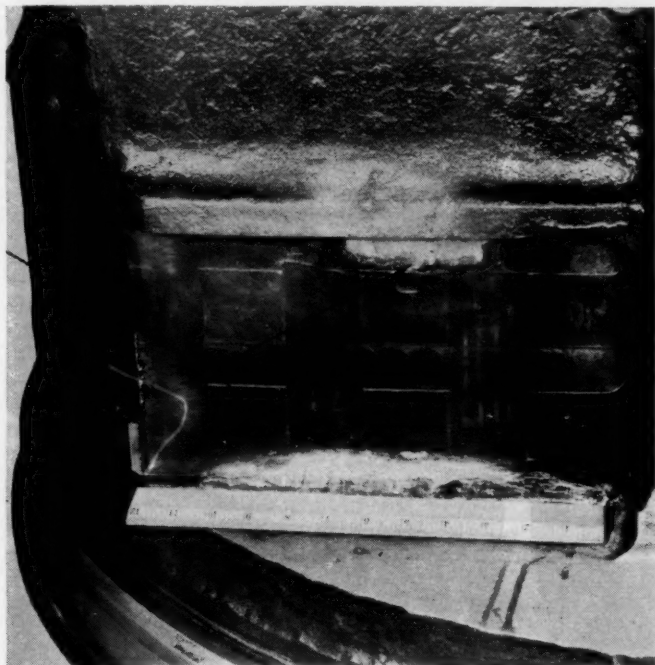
WELDED AREA PARTIALLY COMPLETED. SLAG AND IRREGULARITIES HAVE BEEN REMOVED FROM WELD SURFACE IN PREPARATION FOR PEENING.
